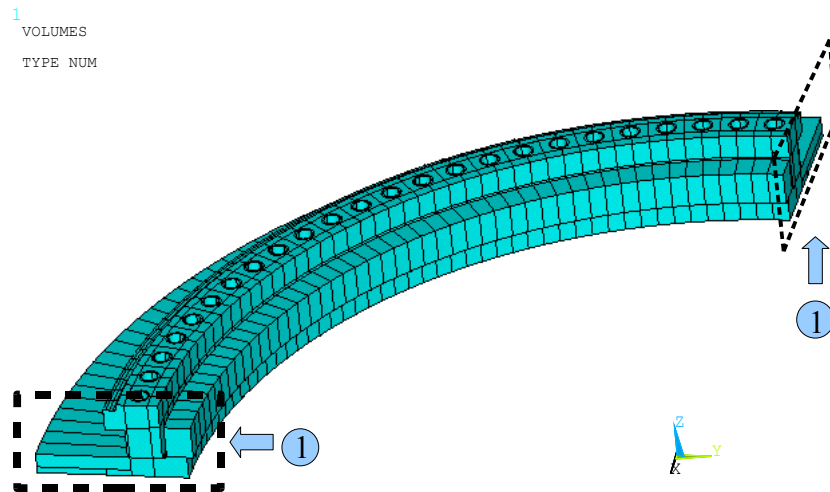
Lower part of the slewbearing - 90° SE segment
